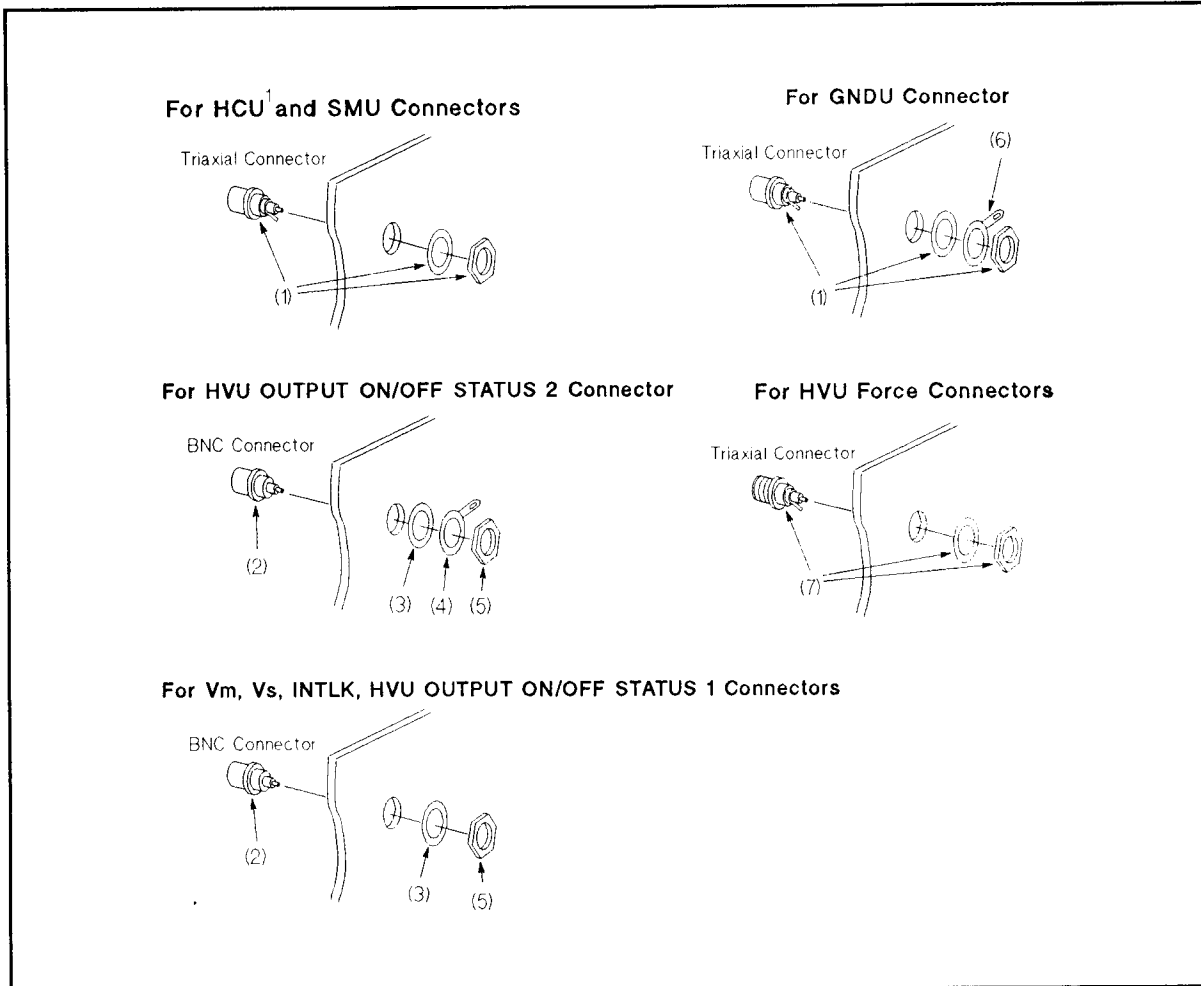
View of Cable Connections in the Test Fixture with Option 300
